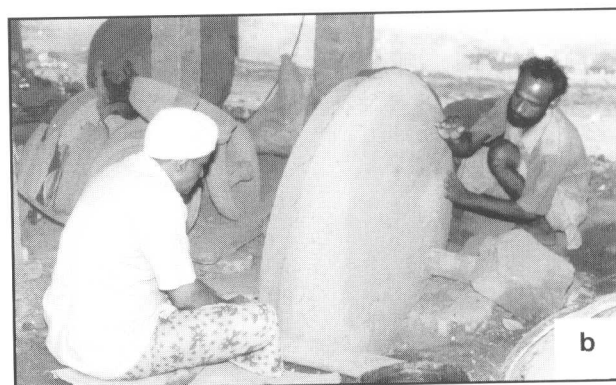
(b) Turning the mould portion using a sharp tool to make it concentric by rotating the same by hand
